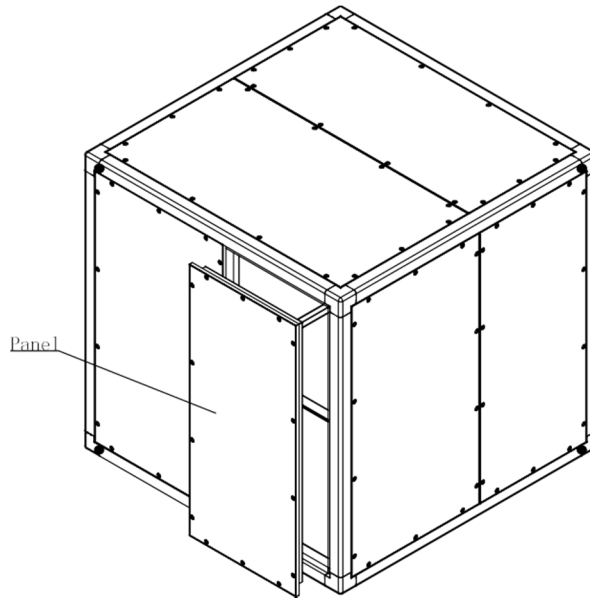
Schematic Diagram – Panel Disassembly Instruction
